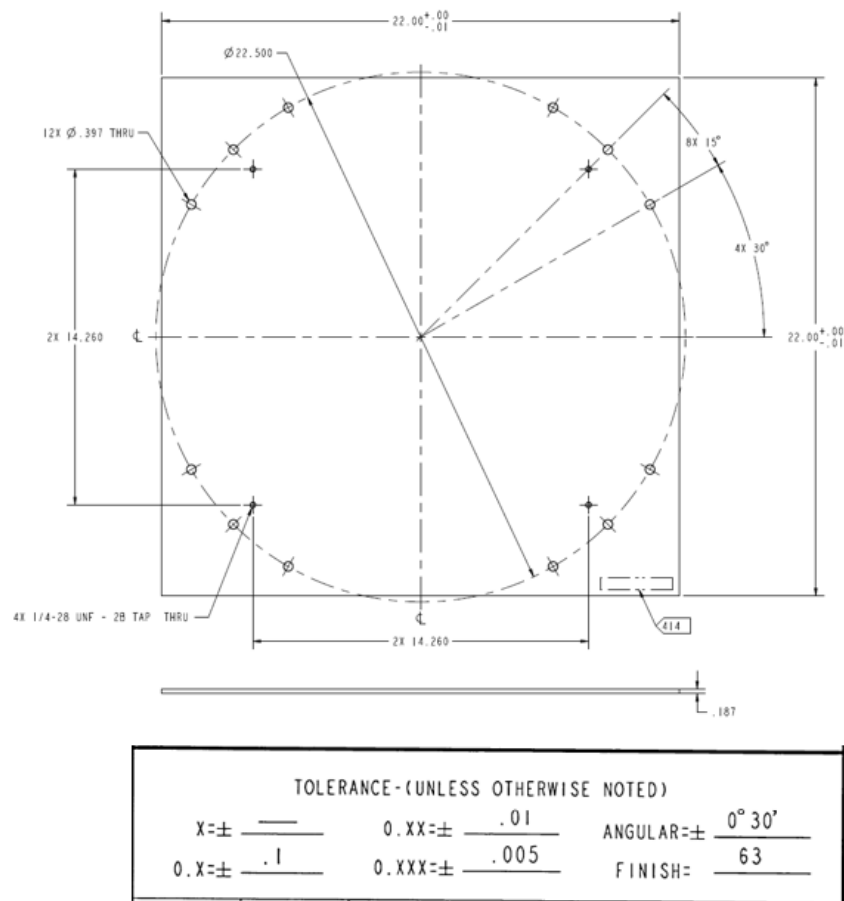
Engineering Drawing (128Y-270955-D3) of the Steel Diaphragm Plate (Dimensions in Inches).
